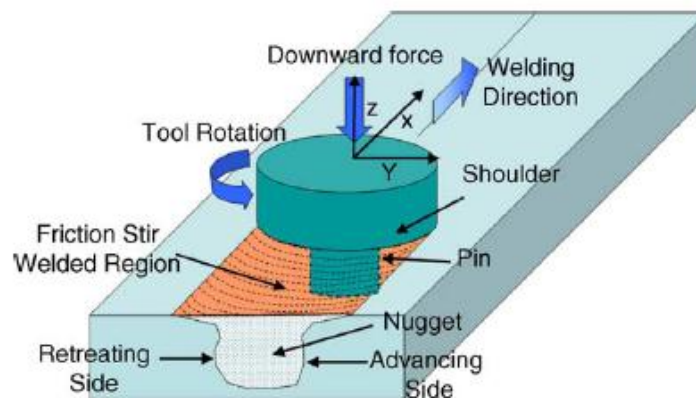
Schematic drawing of friction stir welding [2]
